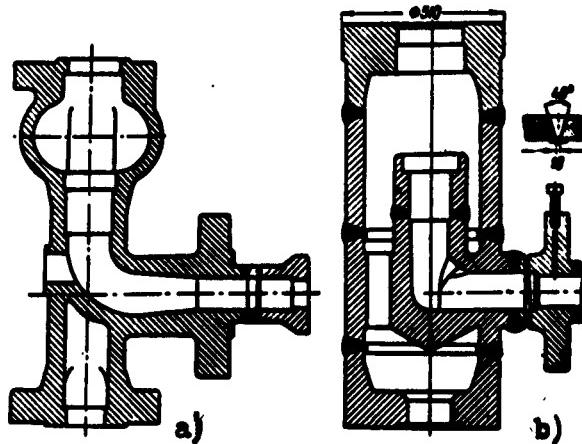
Side steam chest of the SVK-150 turbine. a) cast version; b) welded-forged version.
